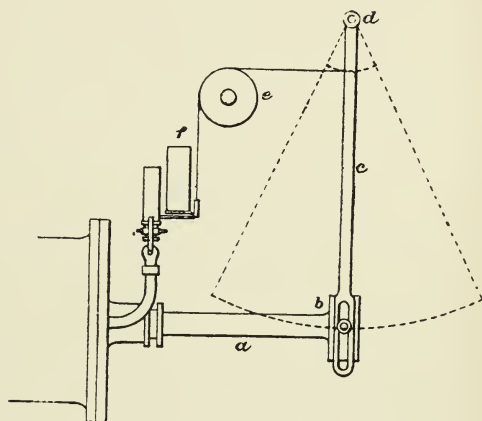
PULLEY AND LEVER INDICATOR GEAR—OVER MOTION.
